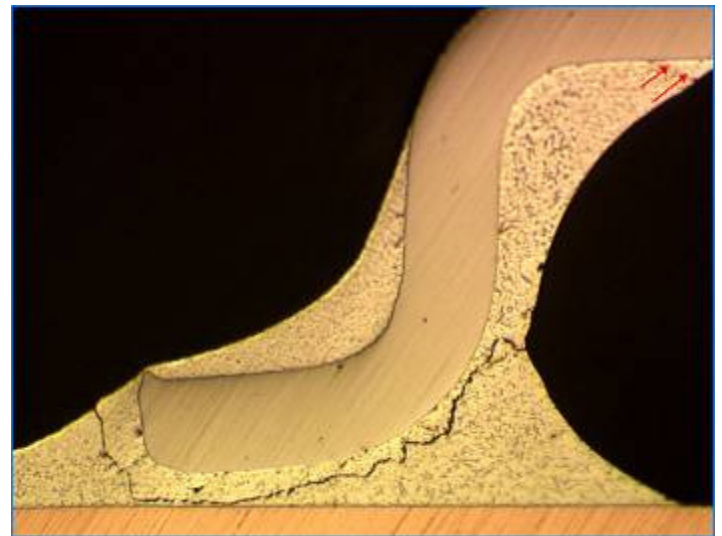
cross section, SN66, U61, left lead solder crack, 100x
